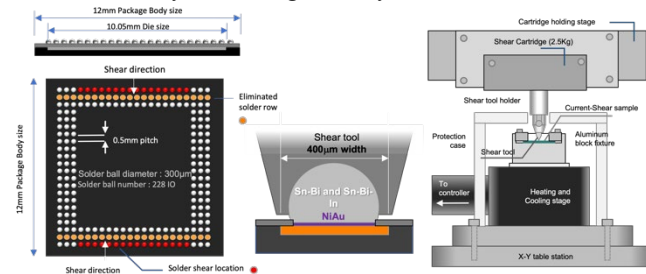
Test vehicle and single solder ball shear test set-up. BGA test component, ball shear tool and solder ball configuration front view and shear tester schematic set-up with heating and cooling stage.[5]
